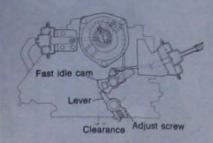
Checking the primary throttle-to-carburettor bore clearance (fast idle cam on third step) Aisan carburettor (Sec 12)
